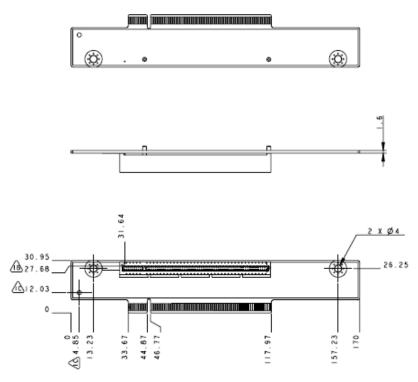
1U PCI Express* Riser Card Mechanical Drawing
